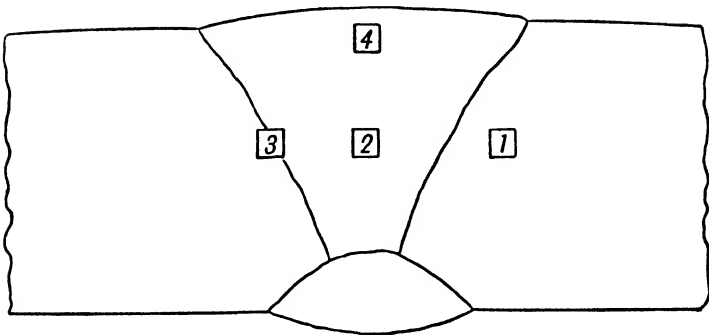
Section of a flat butt weld in rolled steel plate ($\times 3$). 1st run, 8 gauge electrode; 2nd run, 6 gauge electrode; 3rd run, 4 gauge electrode; 4th run, 4 gauge electrode; sealing run, 8 gauge electrode
